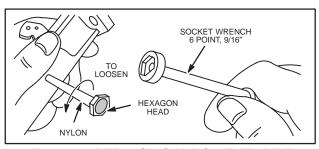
REMOVING AND INSTALLING NEW STYLE THROTTLES
